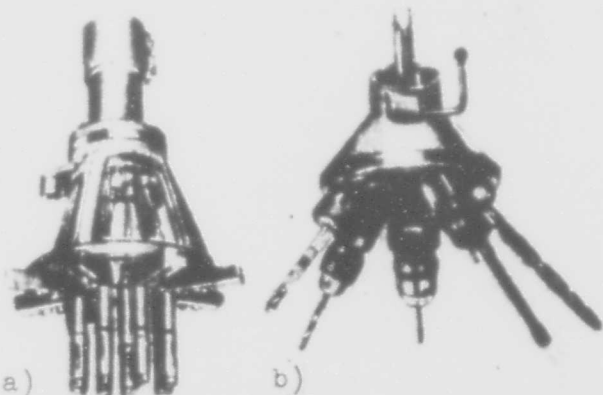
Multi-spindle drilling heads. a) with Cardan transmission, adjustable; b) revolving, automatic.
